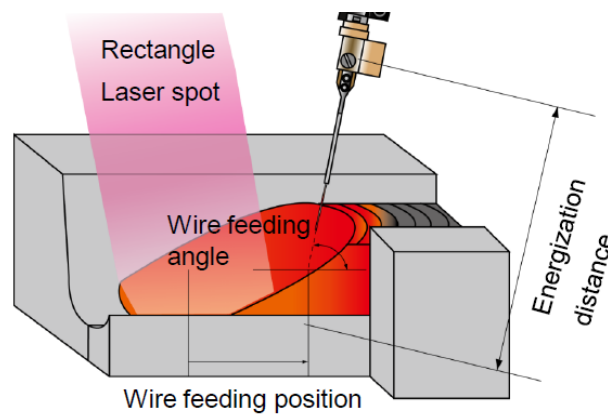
Schematic diagram of hot-wire laser welding [82].
